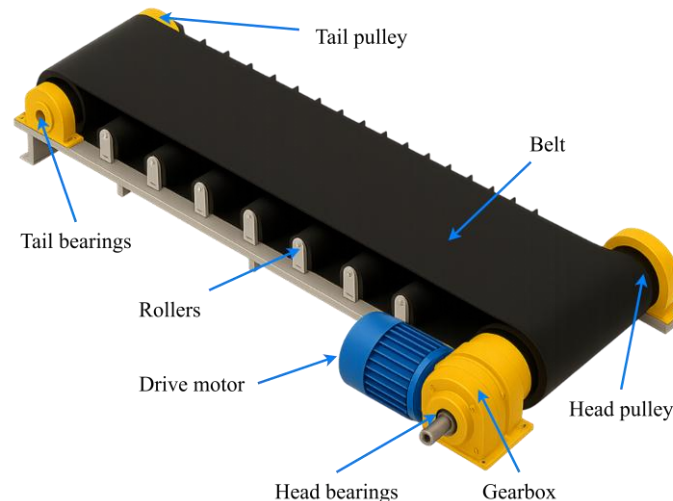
Key components of a belt conveyor: drive motor, gearbox, conveyor belt, rollers, pulleys, and bearings
